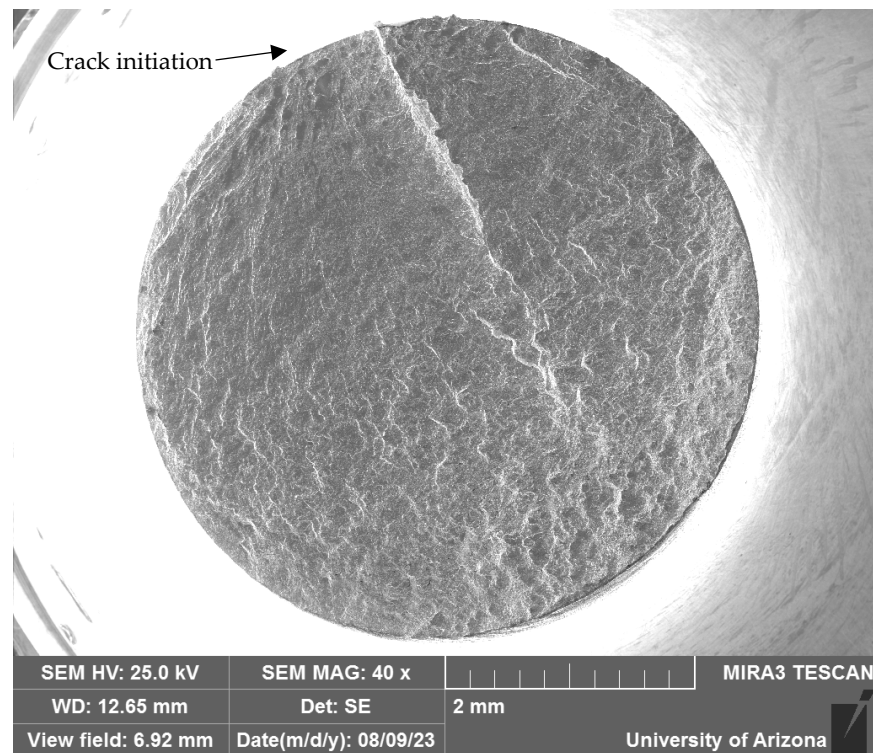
As-built SN4 fatigue fracture surface SEM overview (40×).
